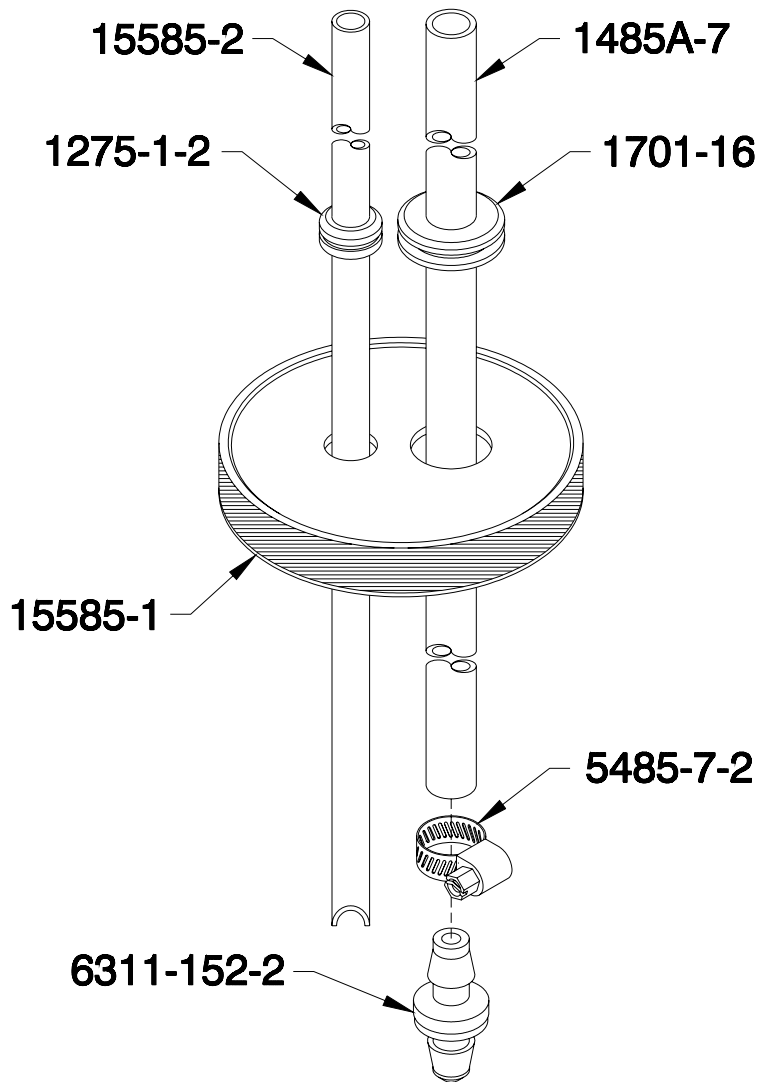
Lube Reservoir Hose Assembly (Part No. 15585), Exploded View
